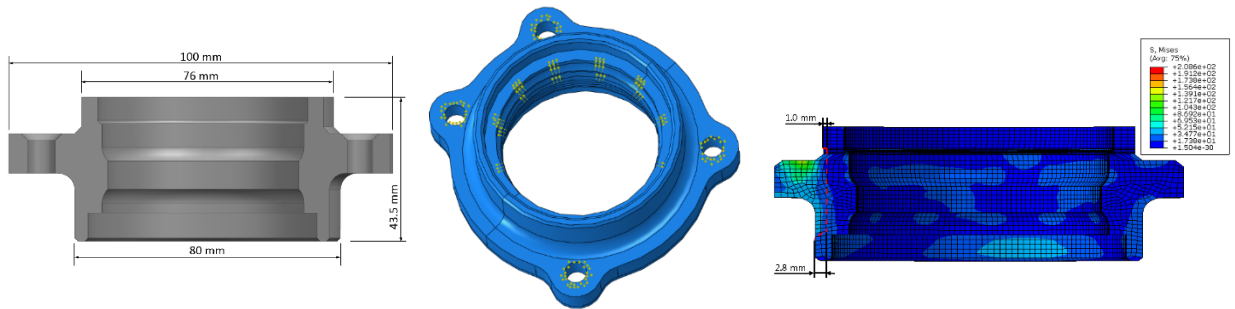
Dimension of the considered wheel bearing; Fig. 5. Load boundary conditions in the ABAQUS stress analysis; Fig. 6. Stress field in the cross section of the steel bearing;
